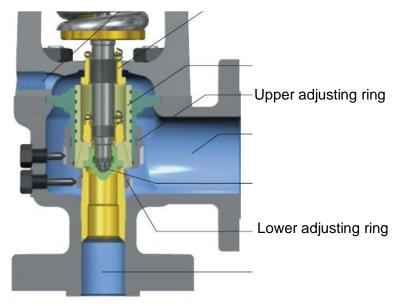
Typical ASME I safety valve design with two adjusting rings
